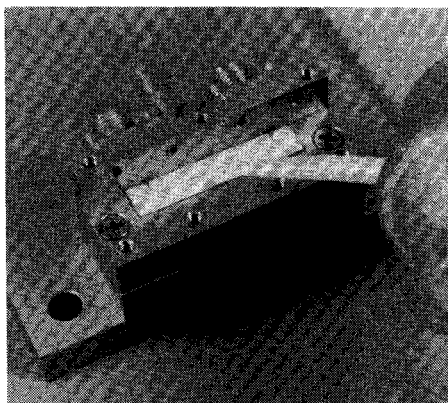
Overall view of the test fixture. A beam lead PIN, wetted with alcohol to the end of a plastic quill, is being conveyed to the gap in the line.
